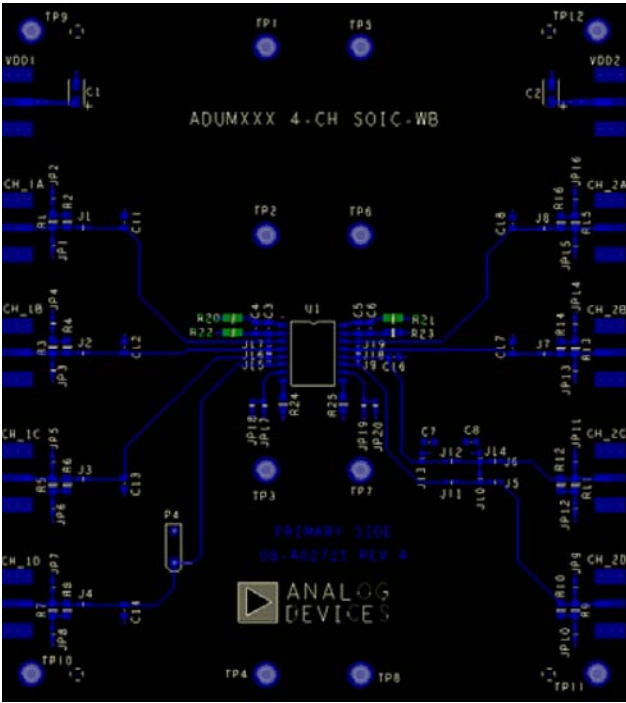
Top Layer 1 of 4-Layer Low Noise PCB Layout
